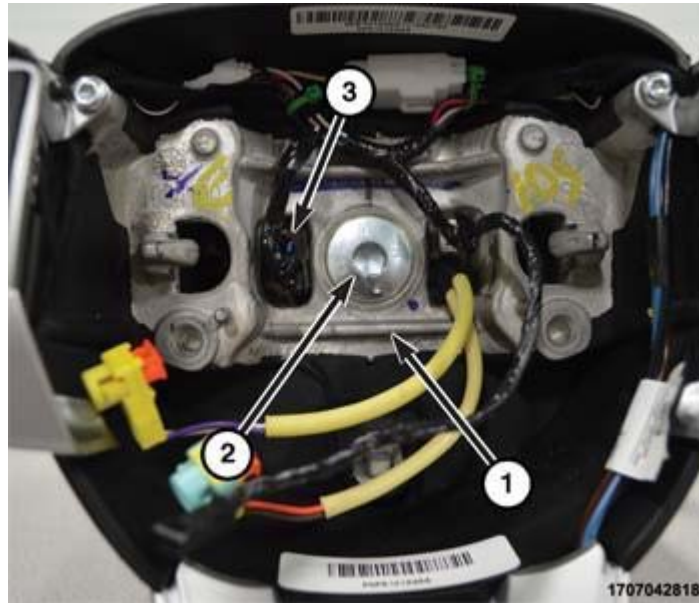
Steering Wheel, Steering Wheel Bolt & Wire Harness Connectors
